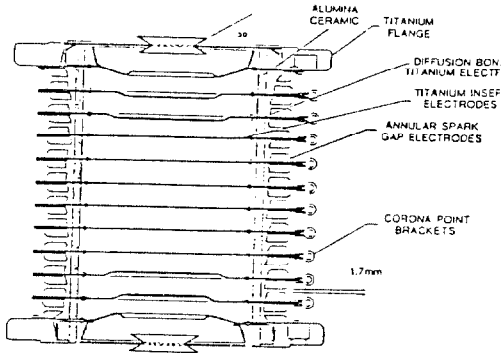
Section view of compressed geometry NEC tube section with vee apertures.
